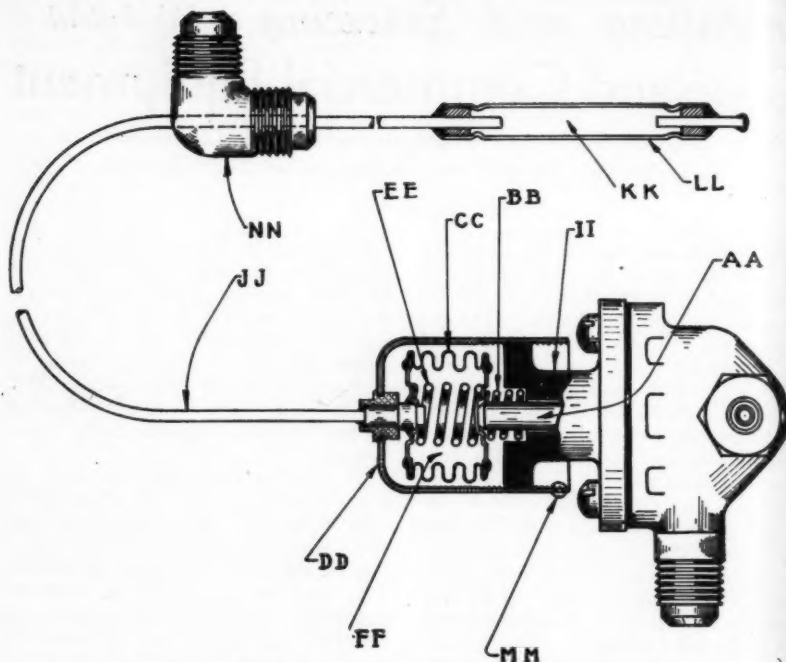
EXPANSION VALVE AND FROST CONTROL ASSEMBLY
